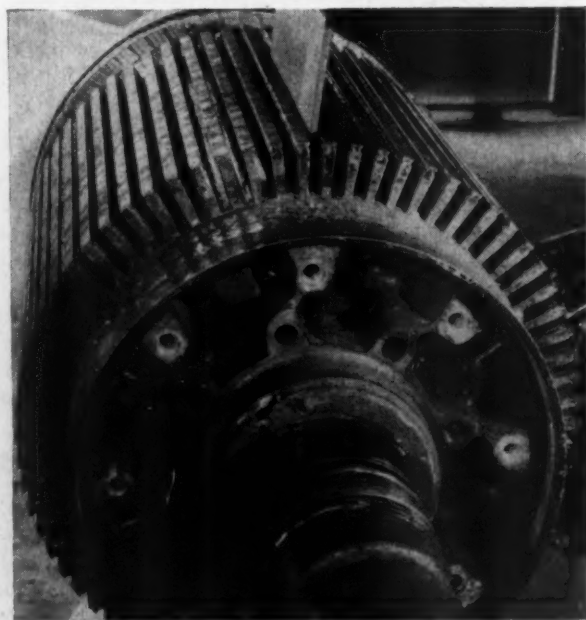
A type D-7 traction motor armature showing the pinion-end coil support before weld
